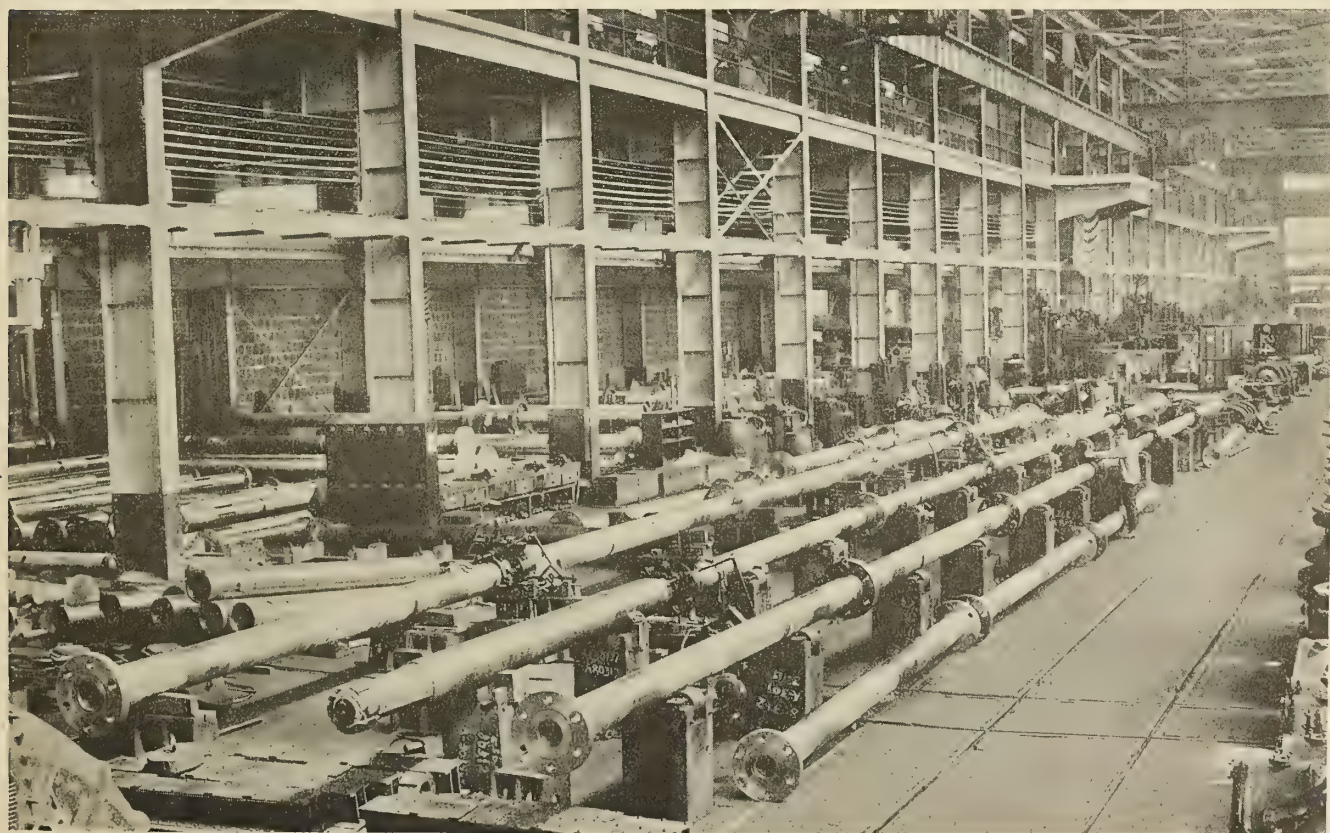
View Showing Line Shafting Set Up in Westinghouse Shops
